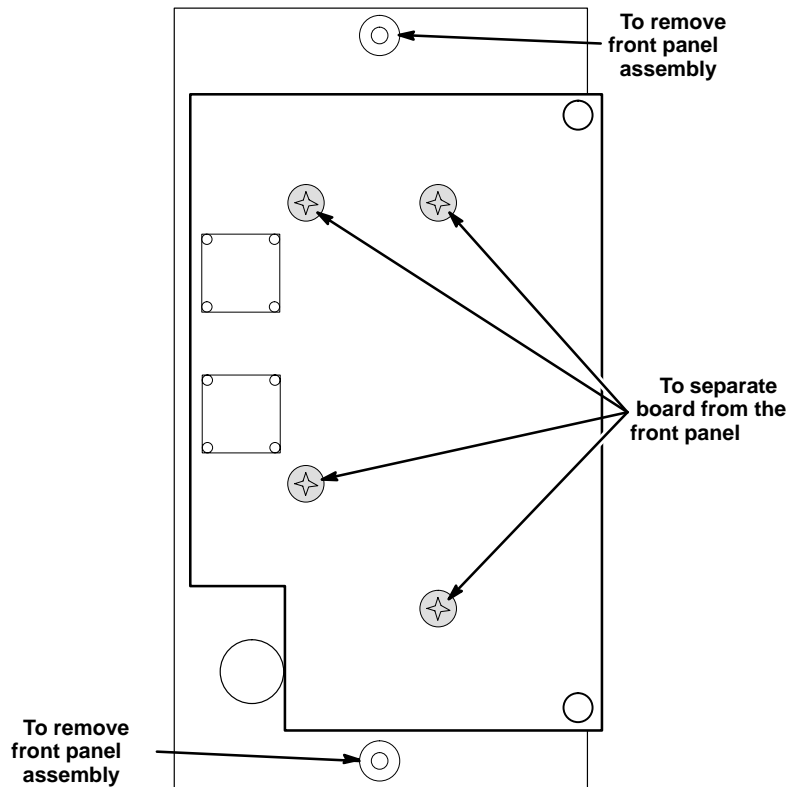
Screws that hold the Front Panel circuit board (A2) in place.
